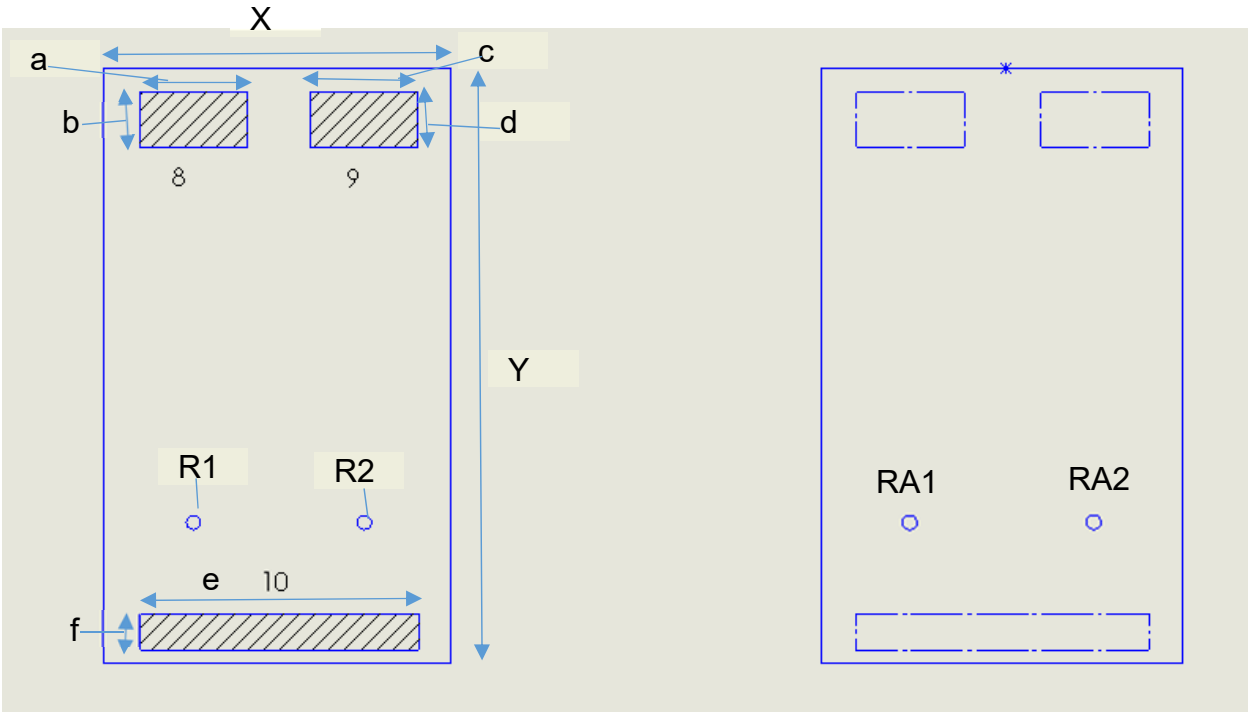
Bottom side clothing: (a) Top view (b) Bottom view
